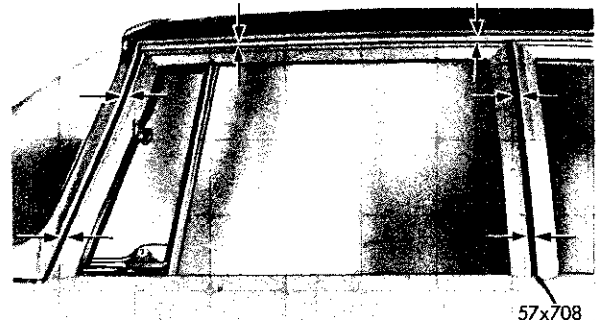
Aligning Upper Door Glass Frame to Hoodline and Rear Door
